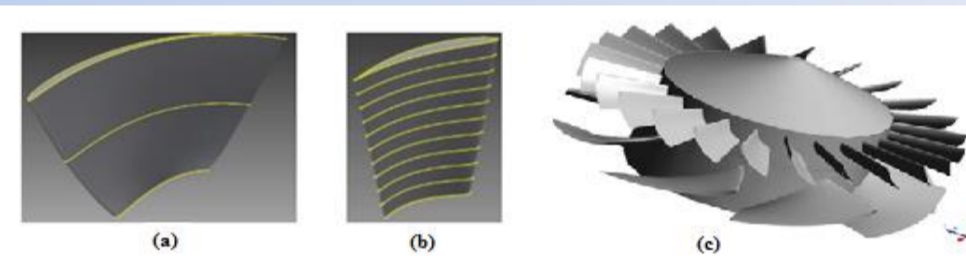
Sample rotor and stator blade development; (a) rotor, (b) stator, (c) rotor and stator blade arrangement [4]
